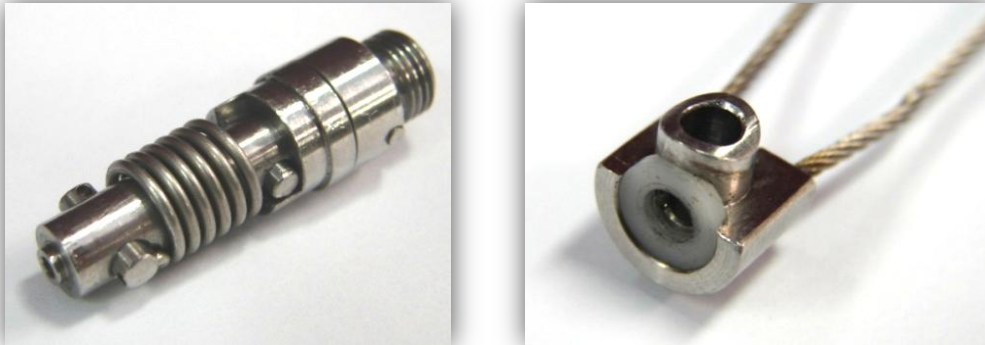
Rotation Joint Rotor Assembly (left) and Cable Guide Assembly (right)
